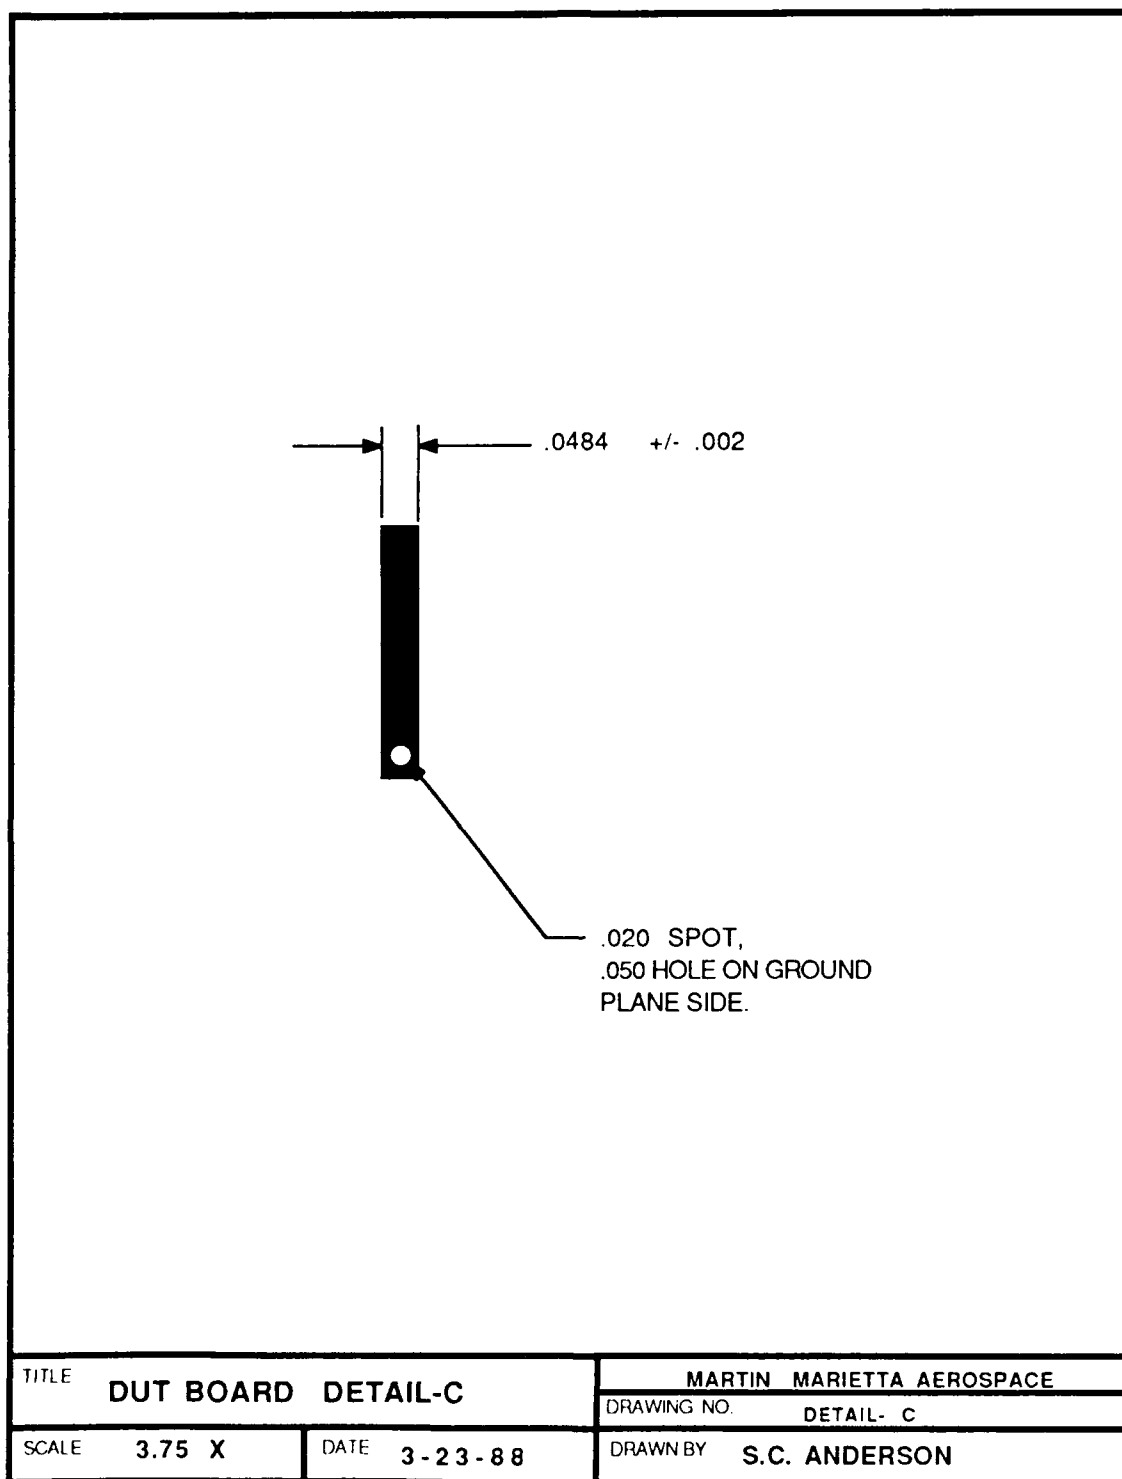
Test Fixture Shop Drawing Showing
